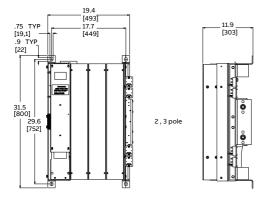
Automatic transfer switch mounting hole dimensions – 63L 2-pole & 3-pole
